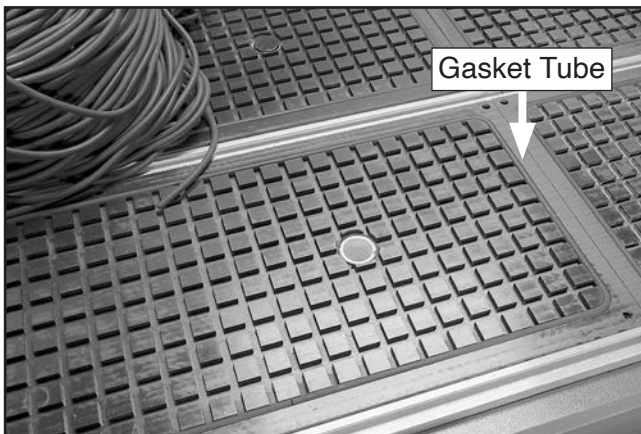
Example of gasket tube cut to size to seal workpiece to vacuum zone.
